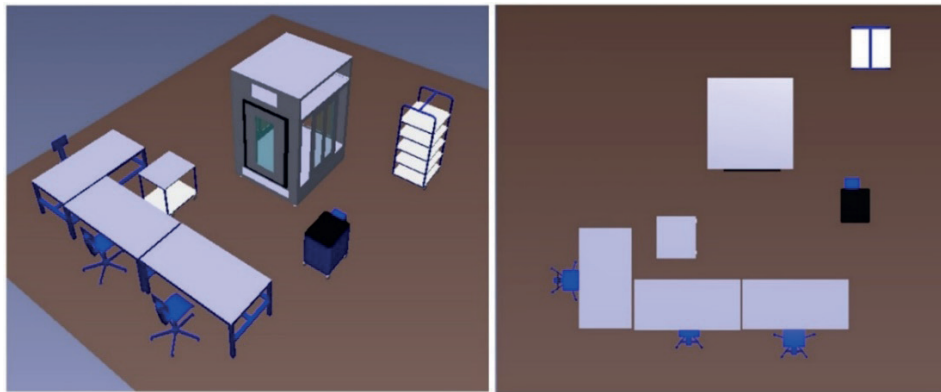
The first variant of the L-shaped arrangement of assembly trolleys
